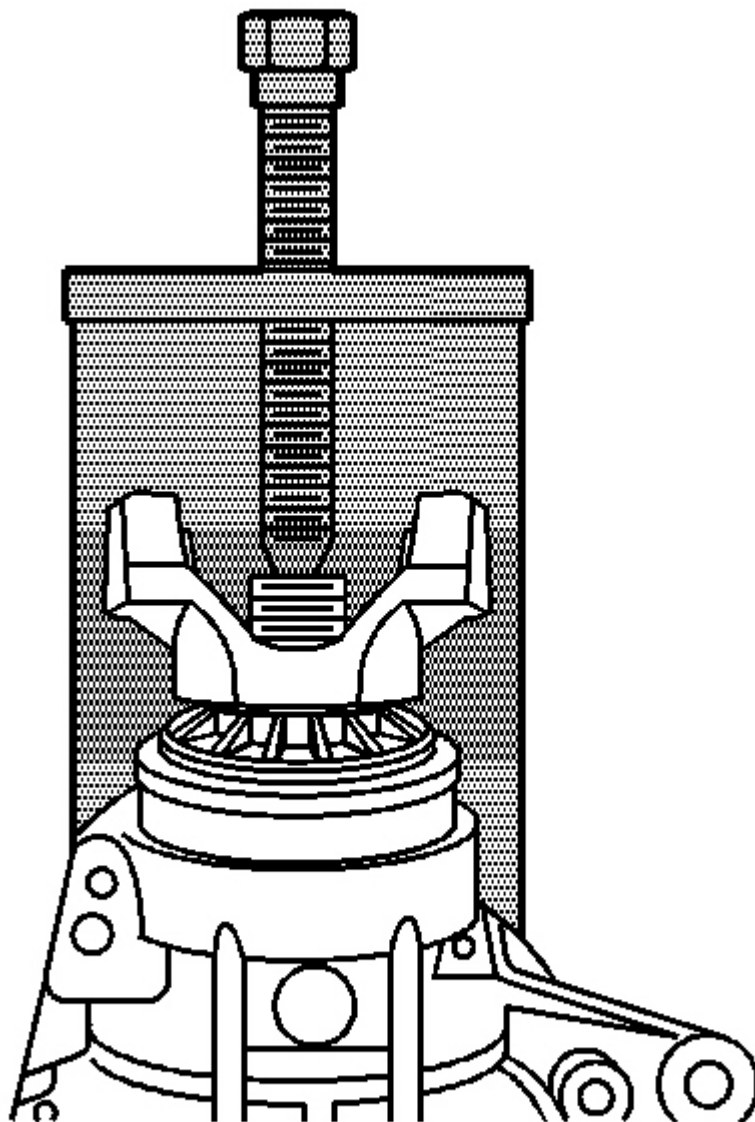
Installing J 45234 To Left Differential Carrier Assembly Case Half
